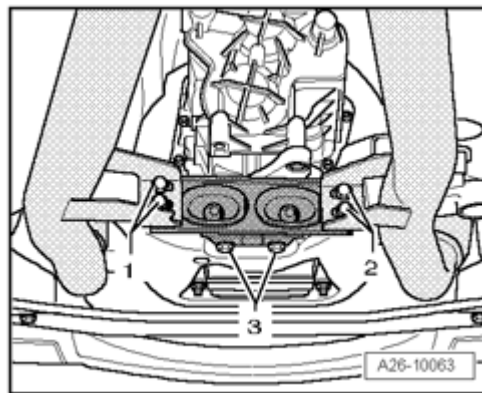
Removing/Installing Mounting Bolts For Front Exhaust Pipes
